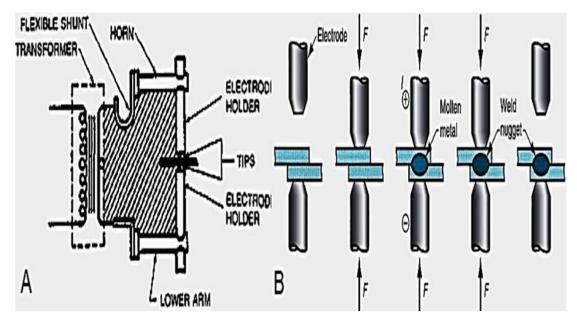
A Typical spot-welding secondary circuit [3] and B Resistance spot welding process [53].
